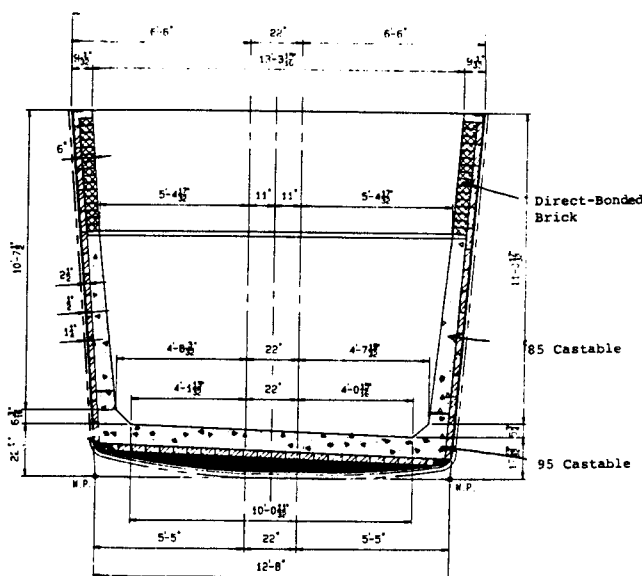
Lining in a caster ladle using a castable barrel and bottom.
